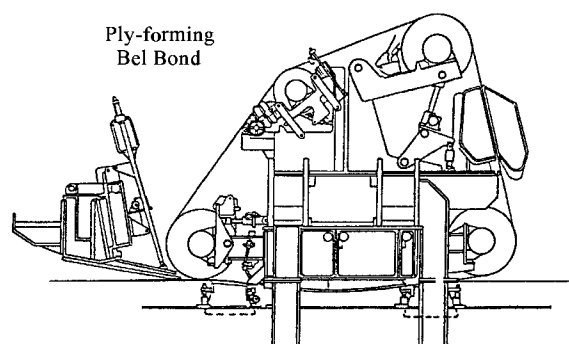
One Bel Bond unit of a multi-ply board machine.
